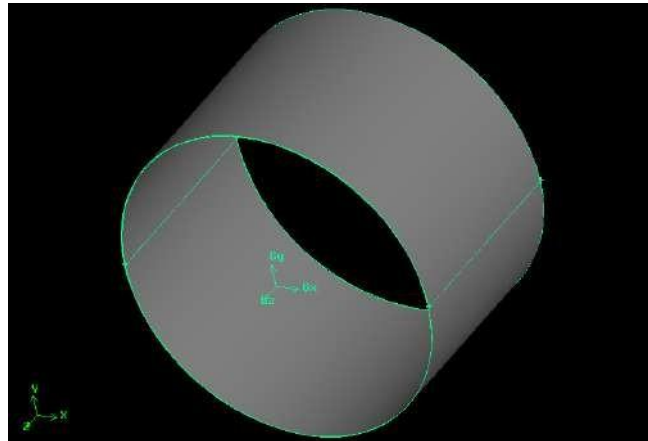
3-dimensional representation of a smooth journal bearing in GAMBIT
